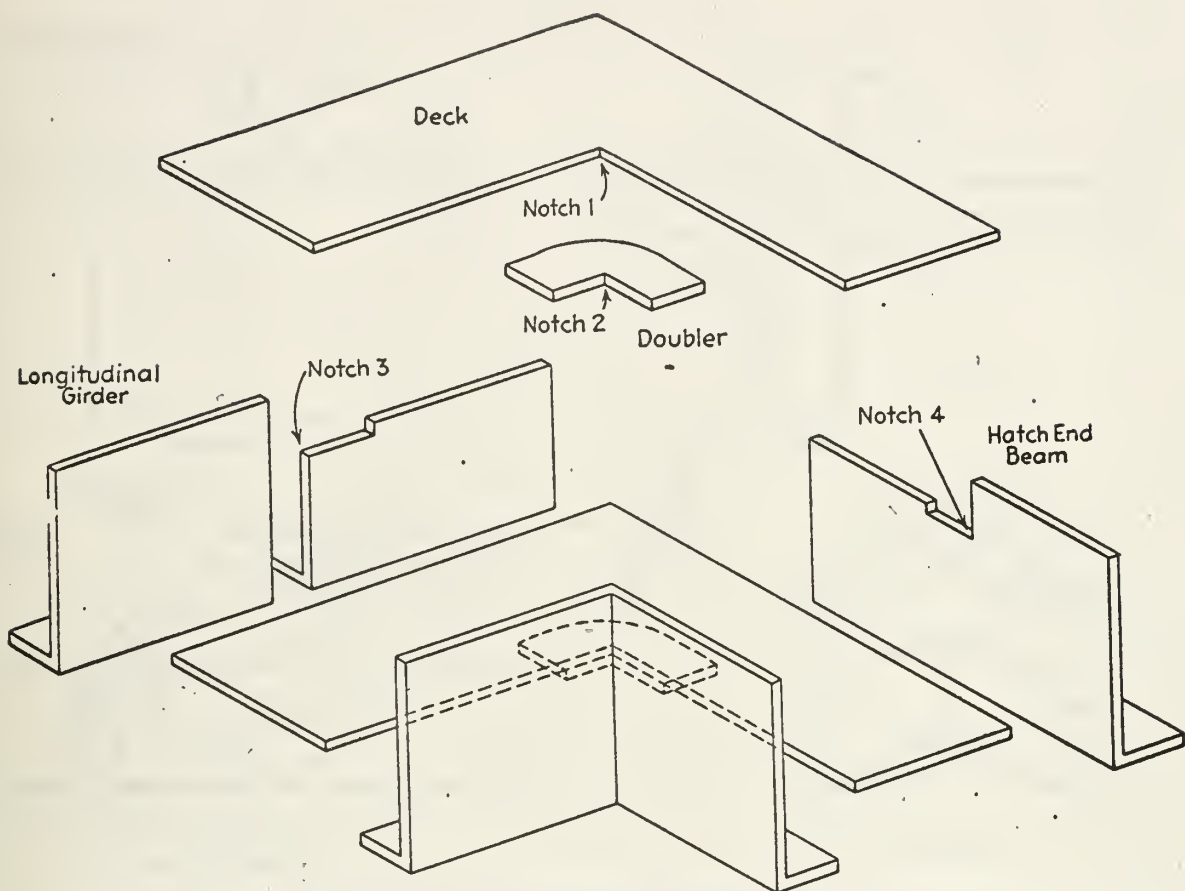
LIBERTY SHIP HATCH CORNER ASSEMBLY AND EXPLODED VIEWS
